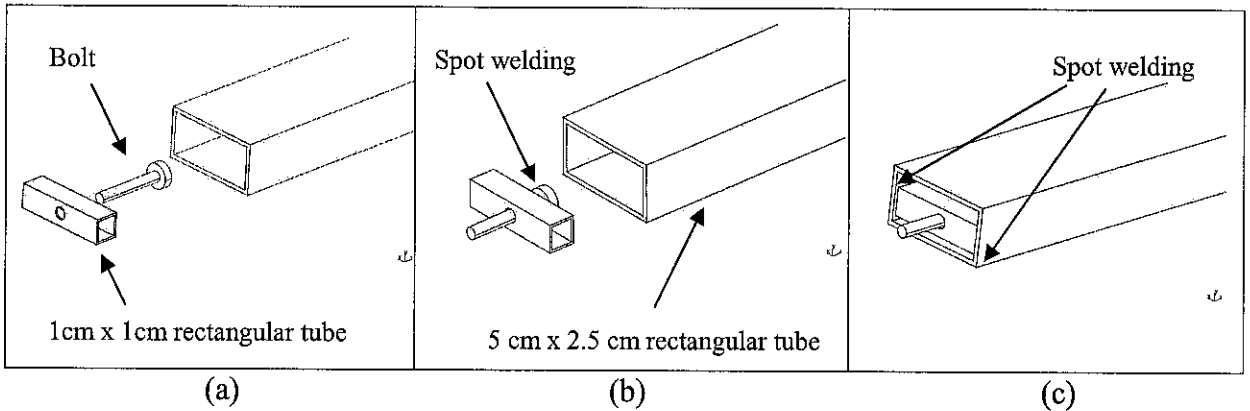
The part required to built the model are (a) assembled together and (b) the bolt will be inserted to the 1cm x 1cm rectangular tube before (c) attached to the 5cm x 2.5cm rectangular tube using spot welding process.
